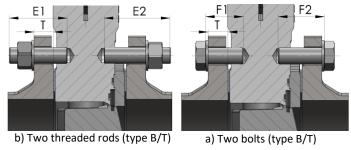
Dimensions of fasteners for valves DN450-600 with type B and T bodies
